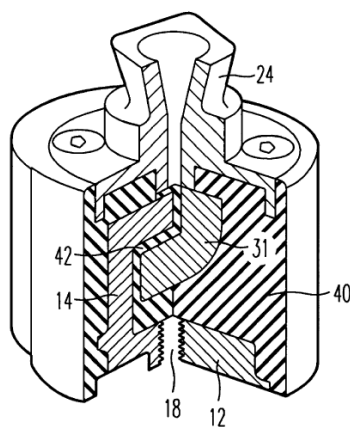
Sectional view of the ankle joint by Lee et al. [28]
